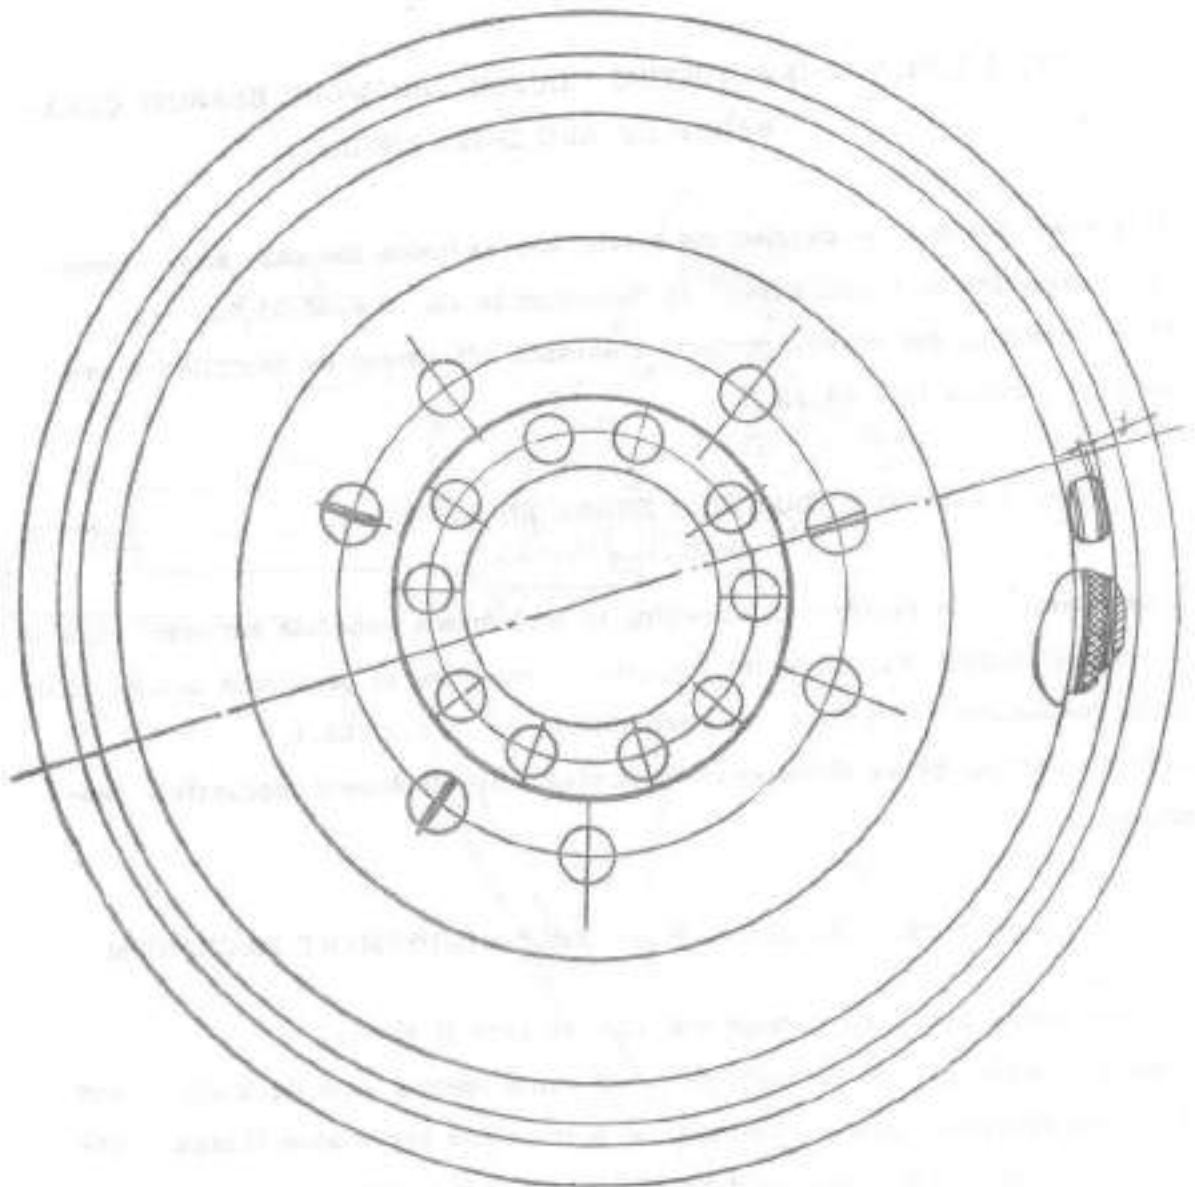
39. BRAKE DRUM OPENING FOR ADJUSTING THE BRAKE SHOES THE CLEARANCE.
